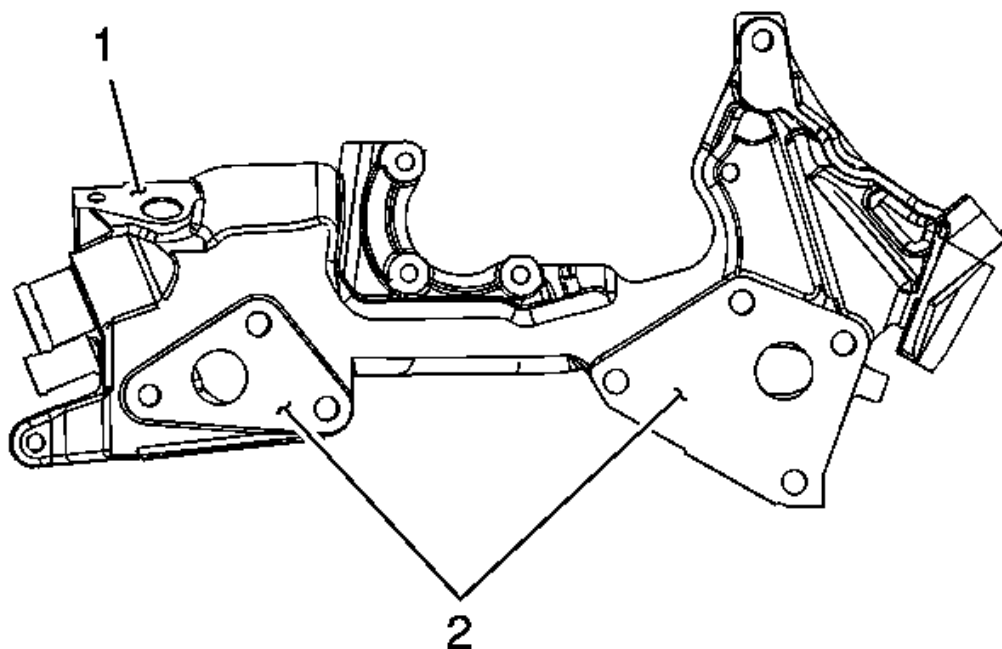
View Of Rear Of Coolant Crossover Pipe
